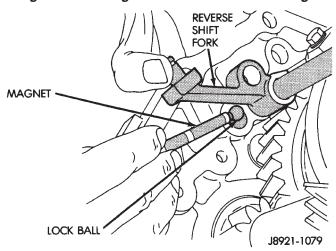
Removing Fifth Gear Shift Rail Lock Ball
